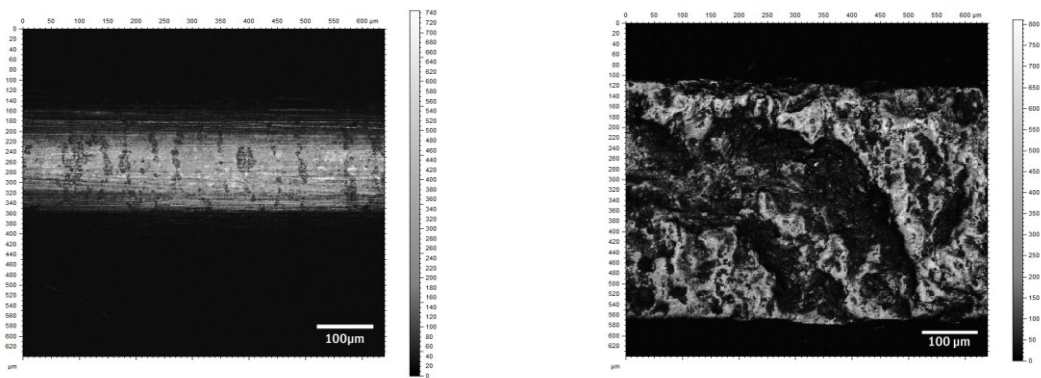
Thread crests of die A3. (Left) New thread. (Right) Used thread.
